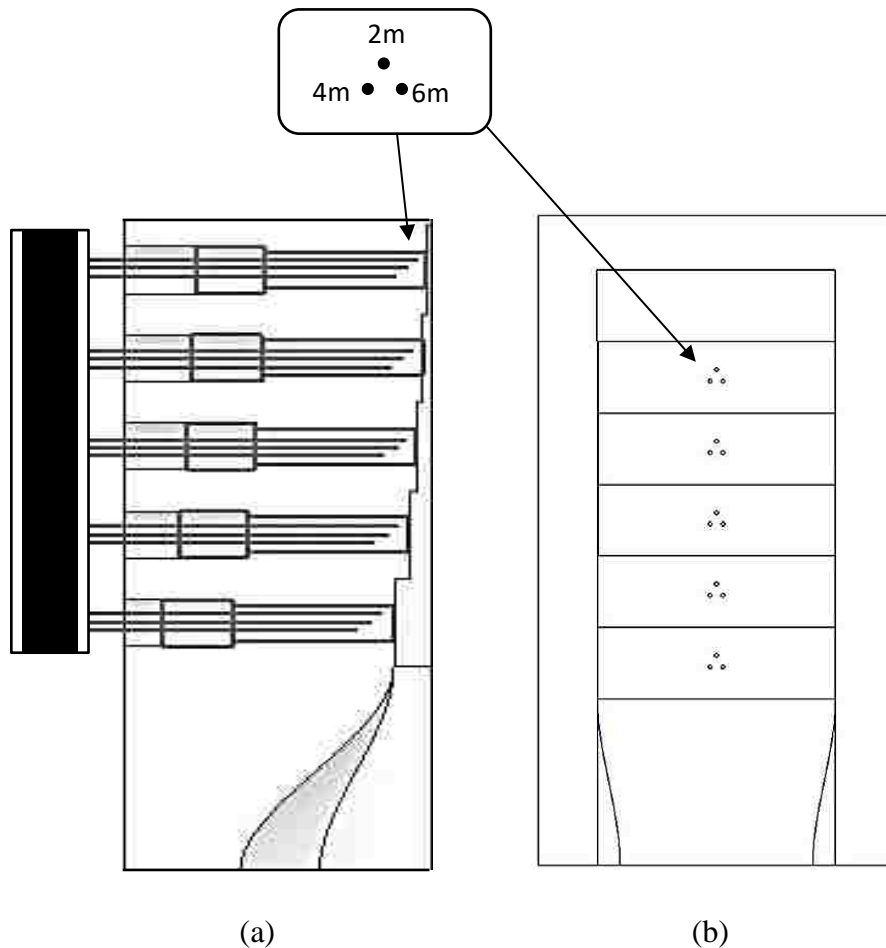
2: a) side view and b) front view of the step die illustrating the locations of the thermocouples in each step.
